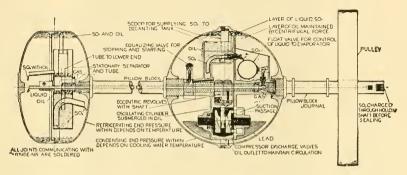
SECTIONAL VIEW OF AUDIFFREN HOUSEHOLD MACHINE.
